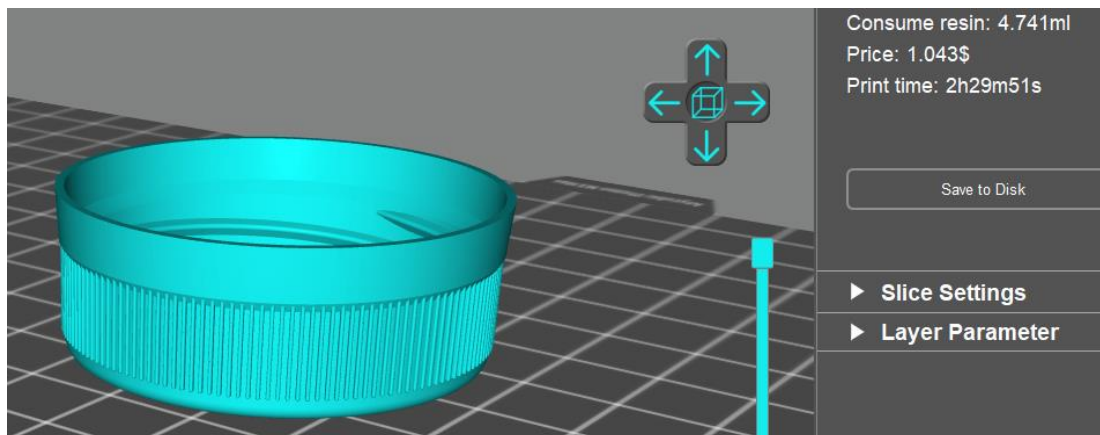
Horizontal positioning of the part on the 3D printer plate
